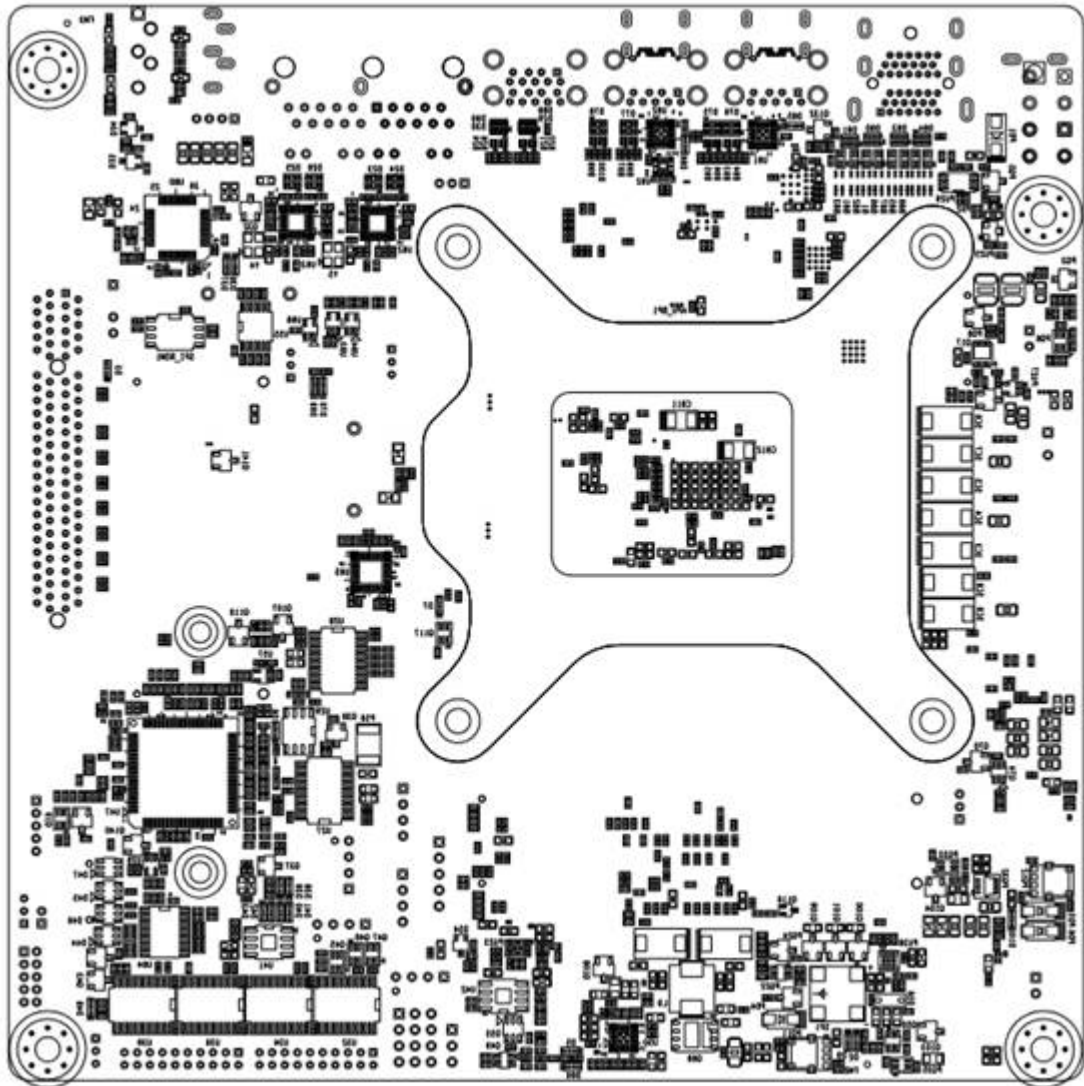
Jumper and Connector Locations (Bottom Side)
